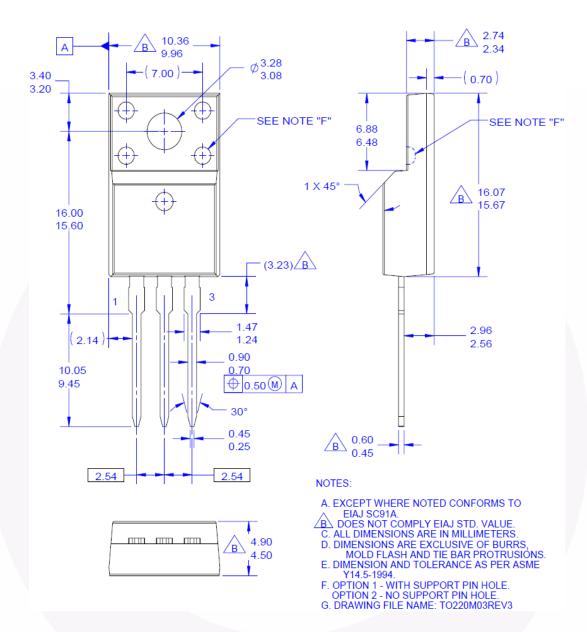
TO-220F 3L - TO220, MOLDED, 3LD, FULL PACK, EIAJ SC91, STRAIGHT LEAD
